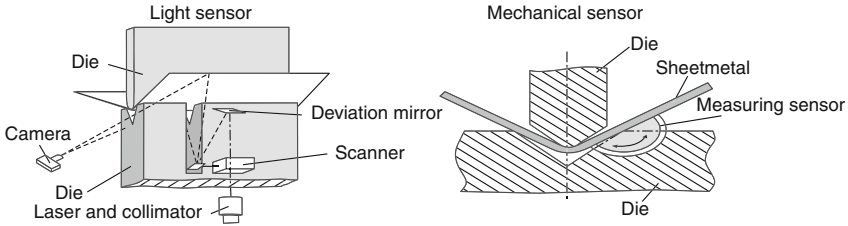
Optical and mechanical measurement of the bending angle [GEIG93a]
